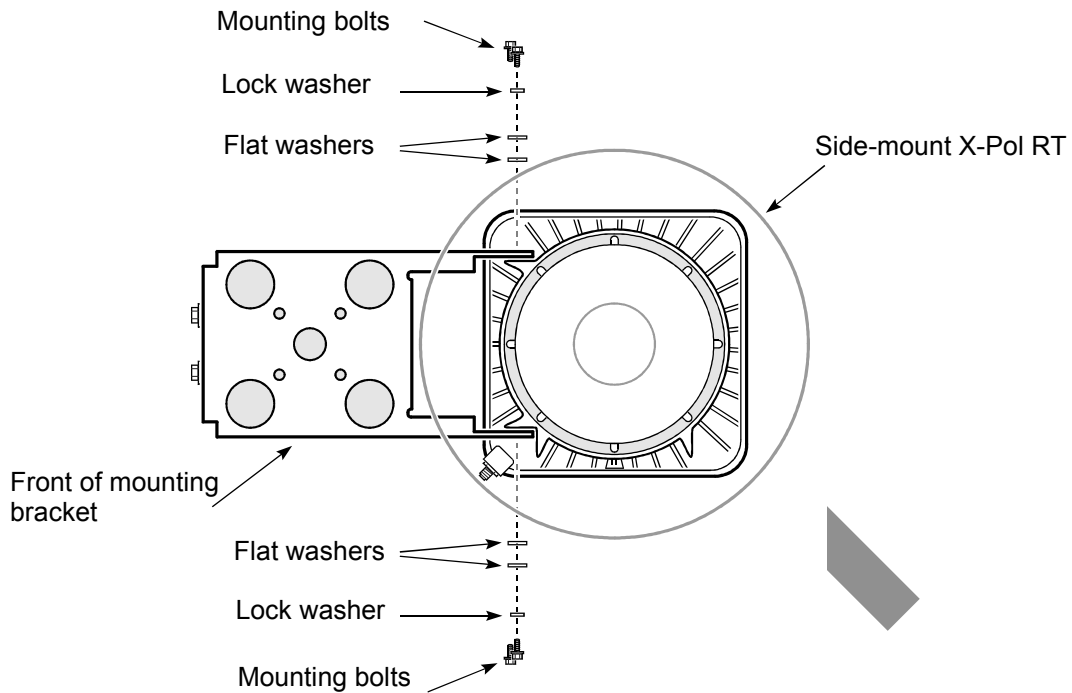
Rear-mount X-Pol RT bolts* shows the bolt locations for the rear-mount X-Pol RT, and *Figure 9 – Side-mount X-Pol RT bolts* shows the bolt locations for the side-mount X-Pol RT.
